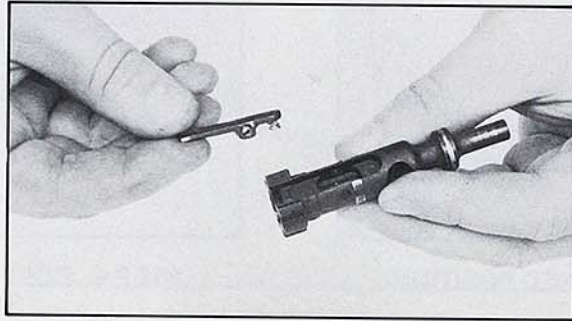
BOLT CARRIER DISASSEMBLY
